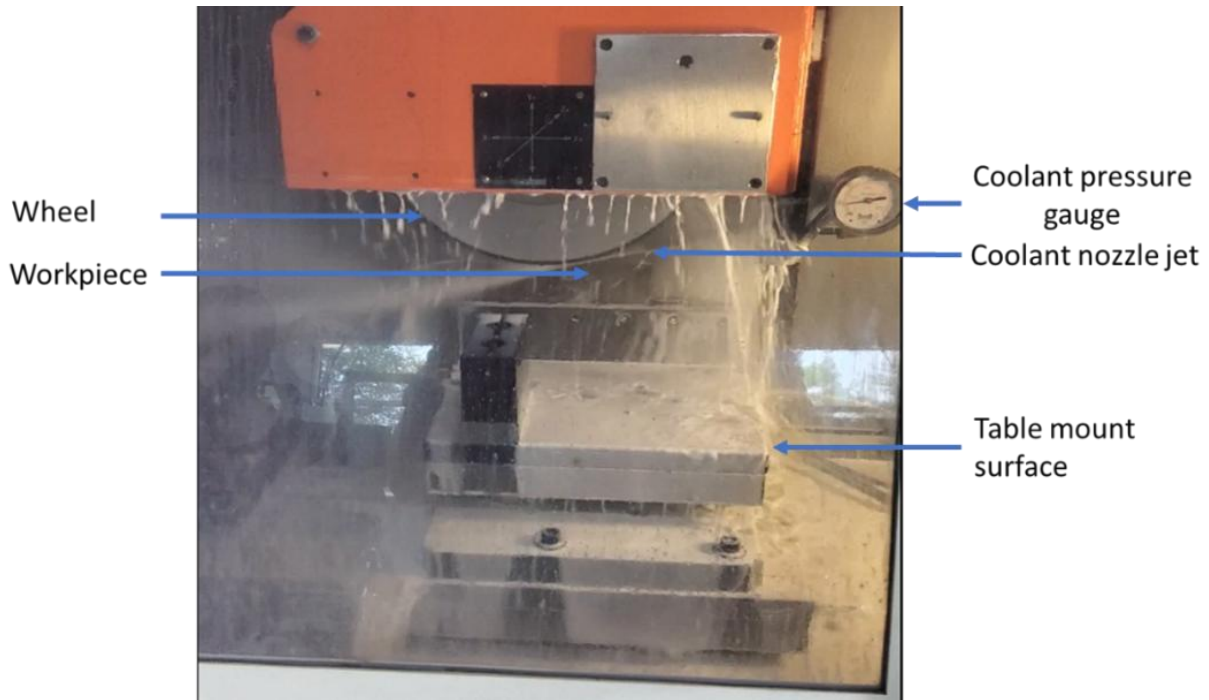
The grinding machine, wheel, and workpiece setup in use
